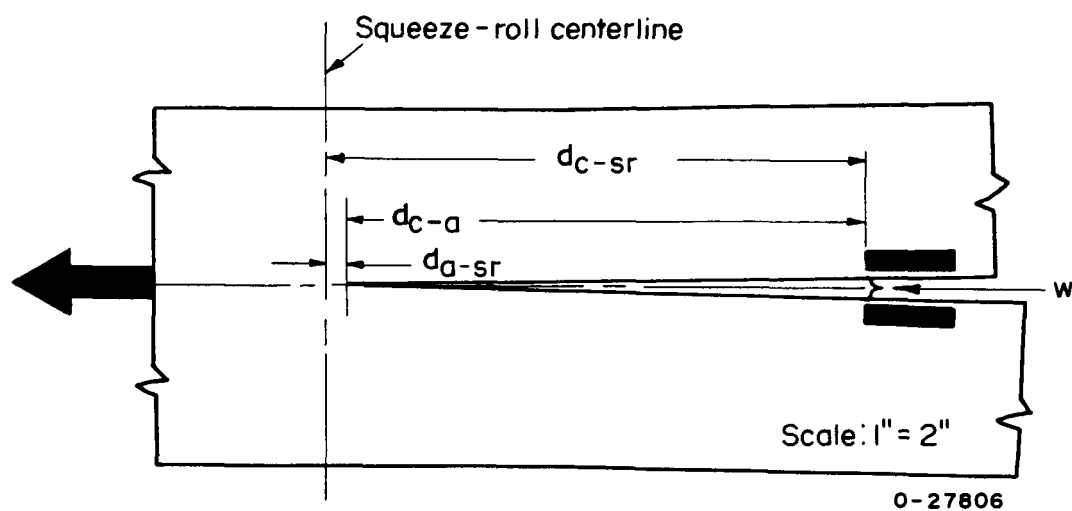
HIGH-FREQUENCY RESISTANCE WELDING OF STRIP
